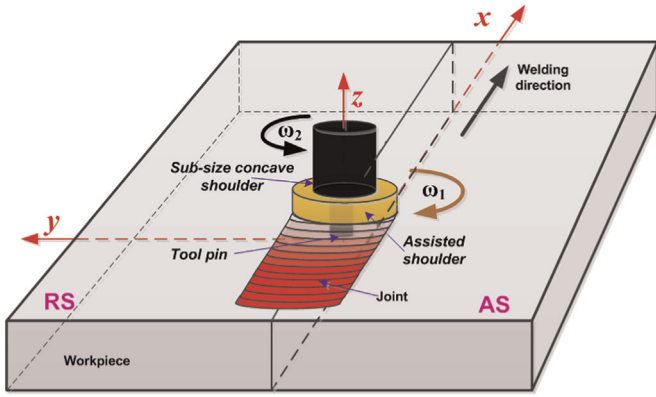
Schematic drawing of reverse dual-rotation friction stir welding (RDR-FSW).
